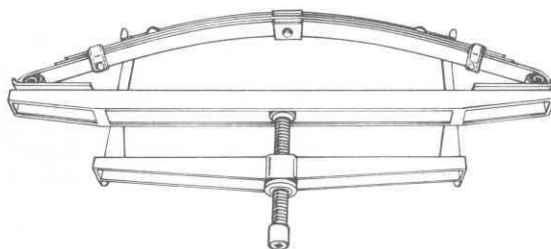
9 To refit the front spring it must be compressed using tool A.74061 as shown
